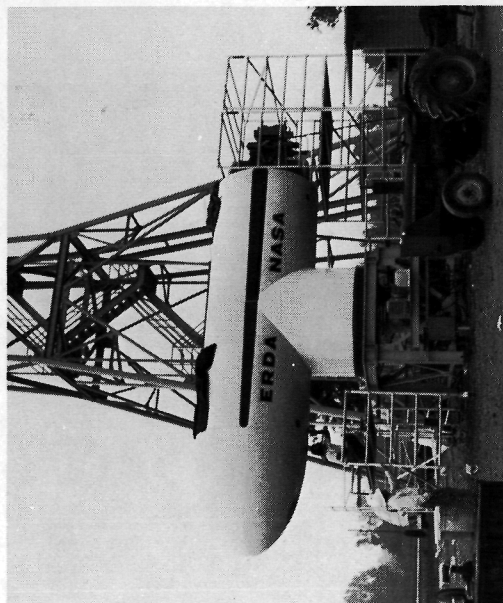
Drive train and yaw assembly at Plum Brook.
